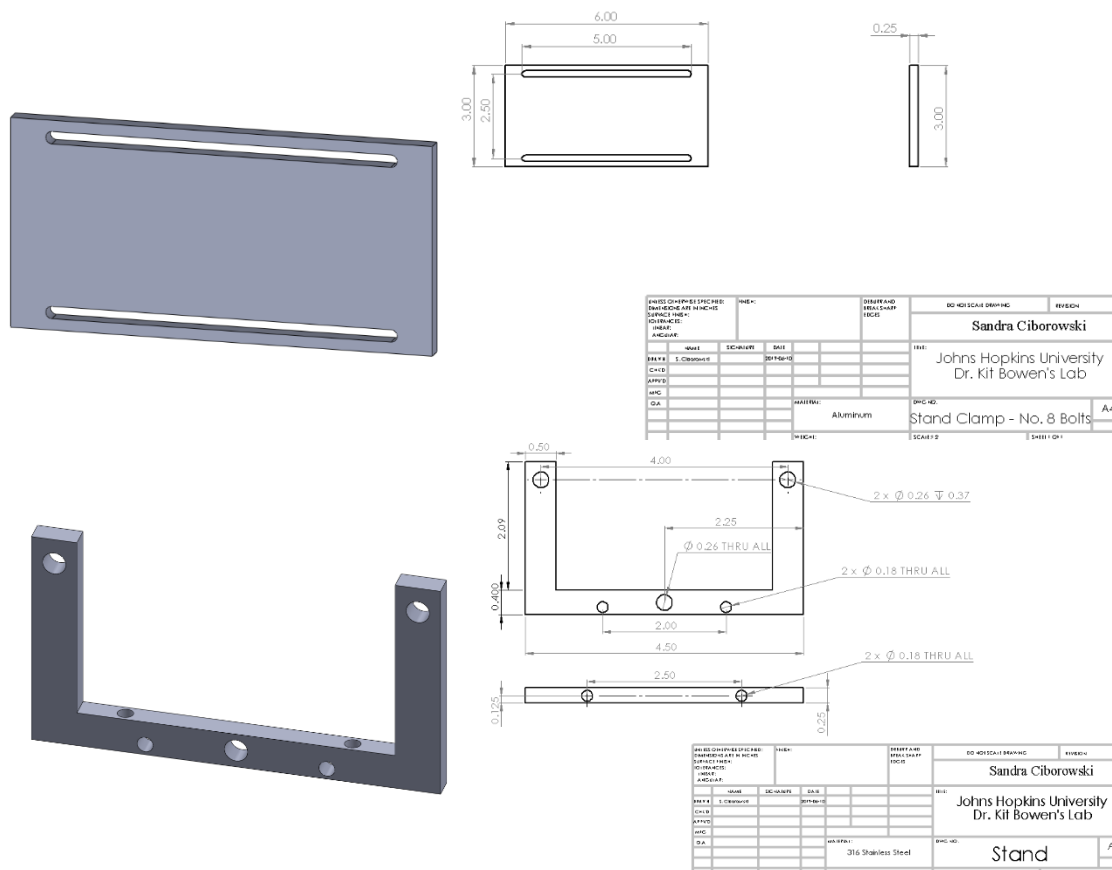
Aluminum (A) Stand and (B) Stand Clamp to Hold LVS Setup Vertically or Horizontally in the Source Chamber.
